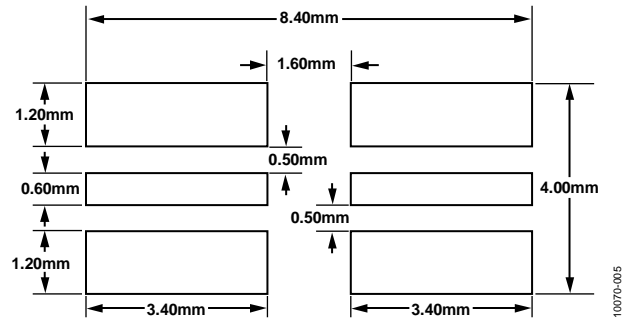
Optimum Footprint Dimensions (Based on Welwyn ULR Green Resistor and Layout in Figure 8)
